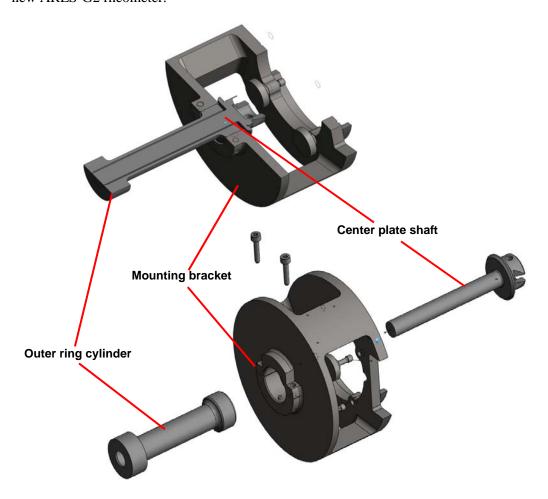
Section view and expanded view of the partitioned plate. The partitioned plate consists of three parts, the center plate shaft, the outer ring cylinder and the mounting bracket.
